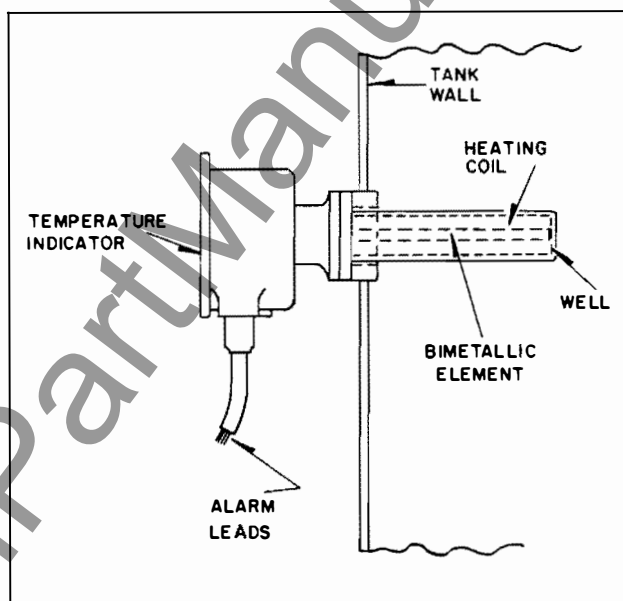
Section View of Transformer Showing Mounting of Indicator
